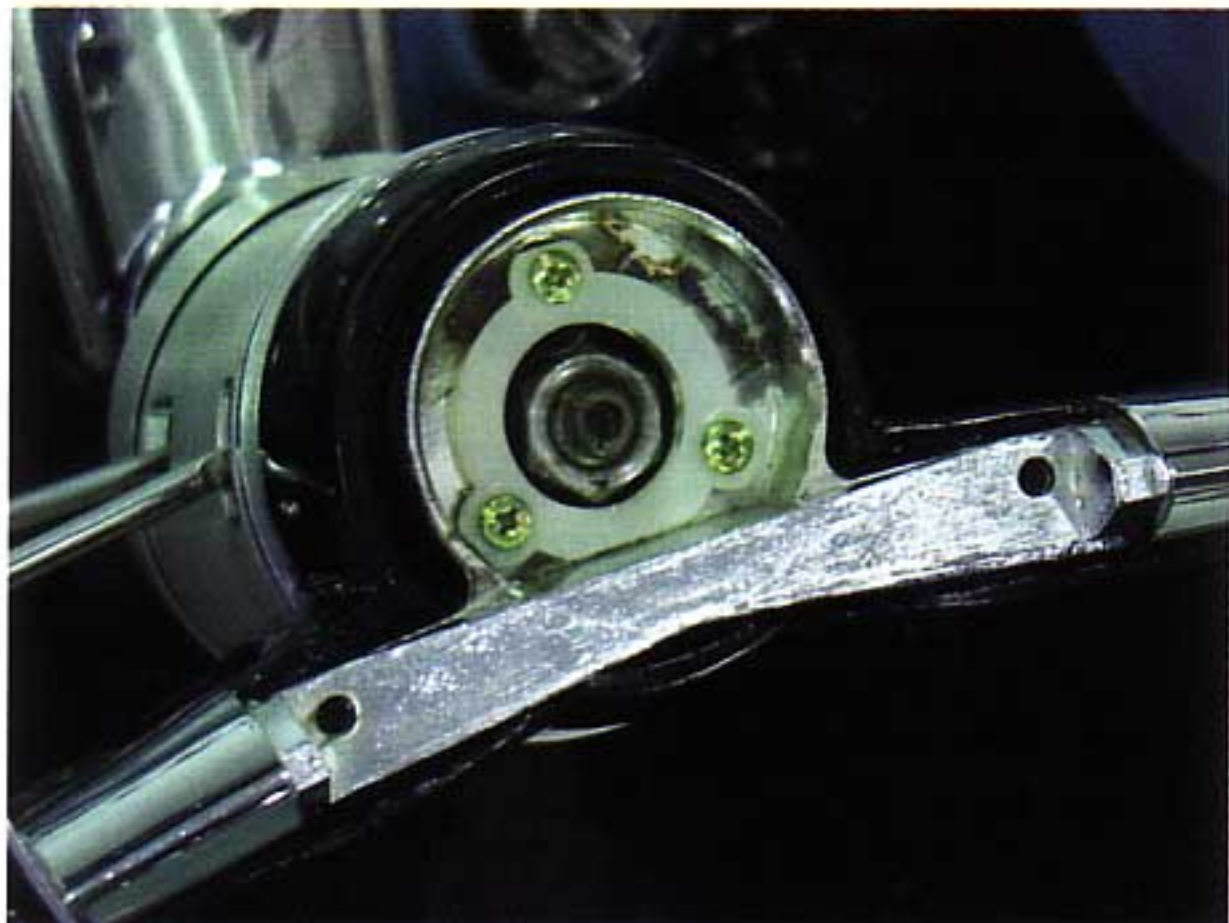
The horn ring is attached to the steering wheel hub with three #10 machine screws. These screws pass through the three ring insulator and hold the horn ring in place. Snug the three screws down to hold the horn ring firm but not too tight. You will want to leave the screws loose enough so that the horn ring will pivot.
